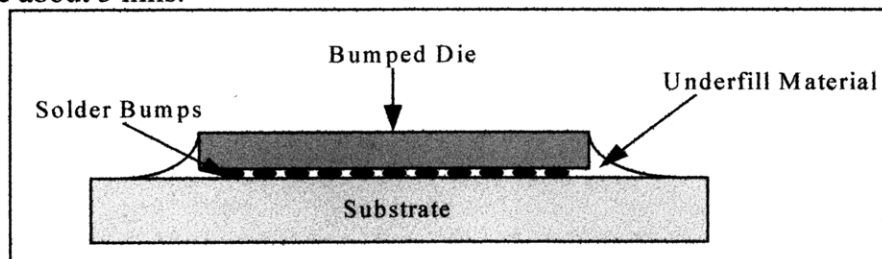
Assembly diagram of a solder bumped die on a substrate with underfill.
